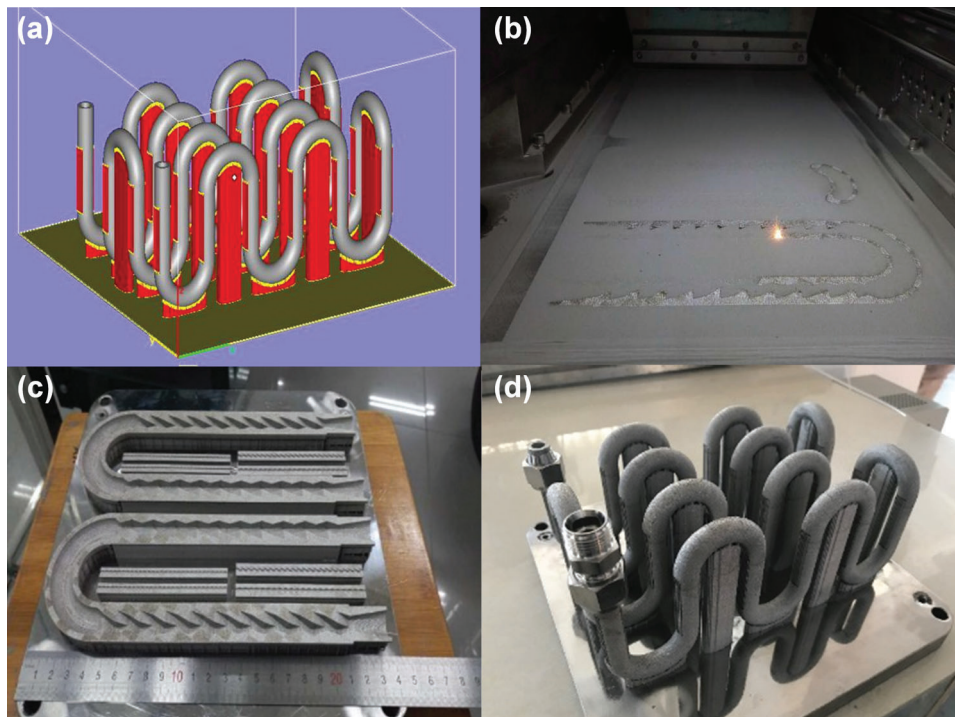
The design and additive manufacturing to extend the length of micromixer: (a) the design of CAD model; (b) additive manufacturing; (c) observation of the micromixer internal structure by Wire Electrical Discharge Machining (WEDM); (d) welding joints
